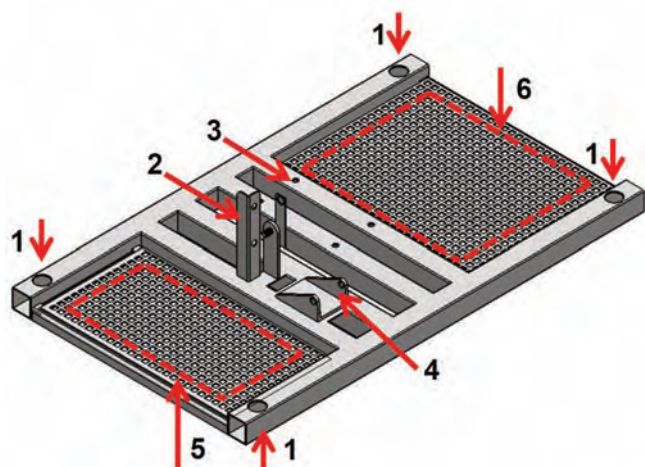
Support frame of the range extender: 1 – hole for mounting of damping elements, 2 – bracket of a rectifier bridge, 3 – hole for mounting an engine, 4 – bracket of a generator, 5 – area for mounting control devices, 6 – area for mounting an engine management system (in future)
